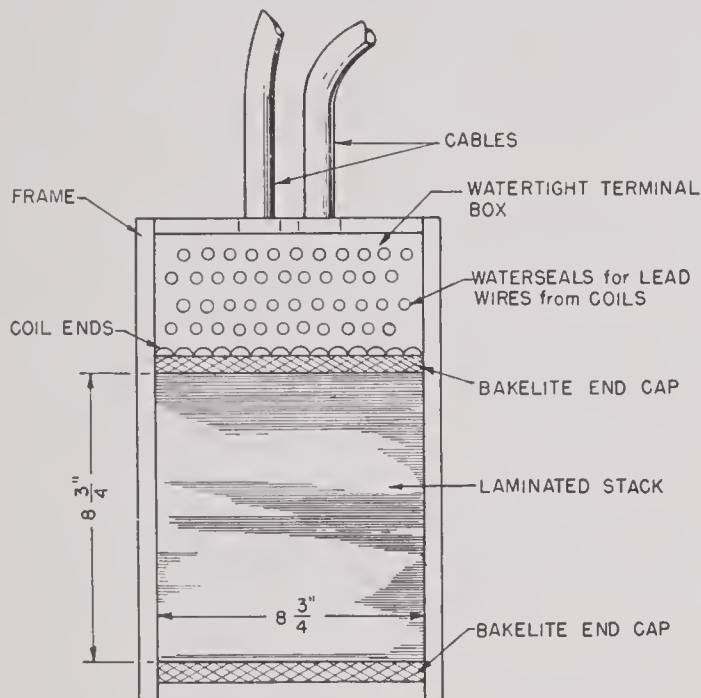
Sketch of front view of Model 1, 9 x 9-in. asymmetrical stack transducer.
